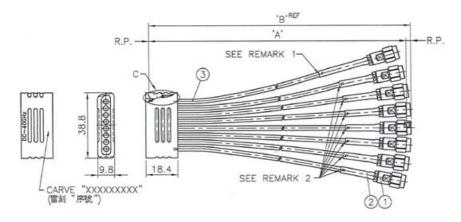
Cable assembly – Type A M-SMPM to K-connector
